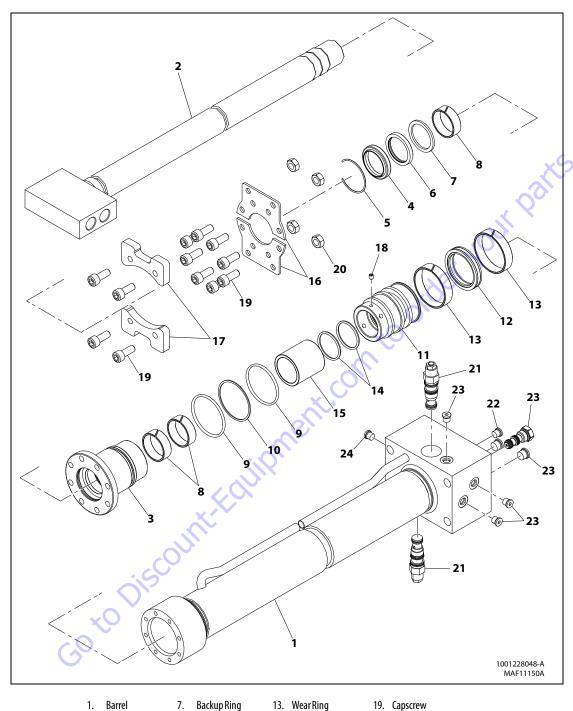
Jib Telescope Cylinder (SN 0300213727 through 0300244704)
